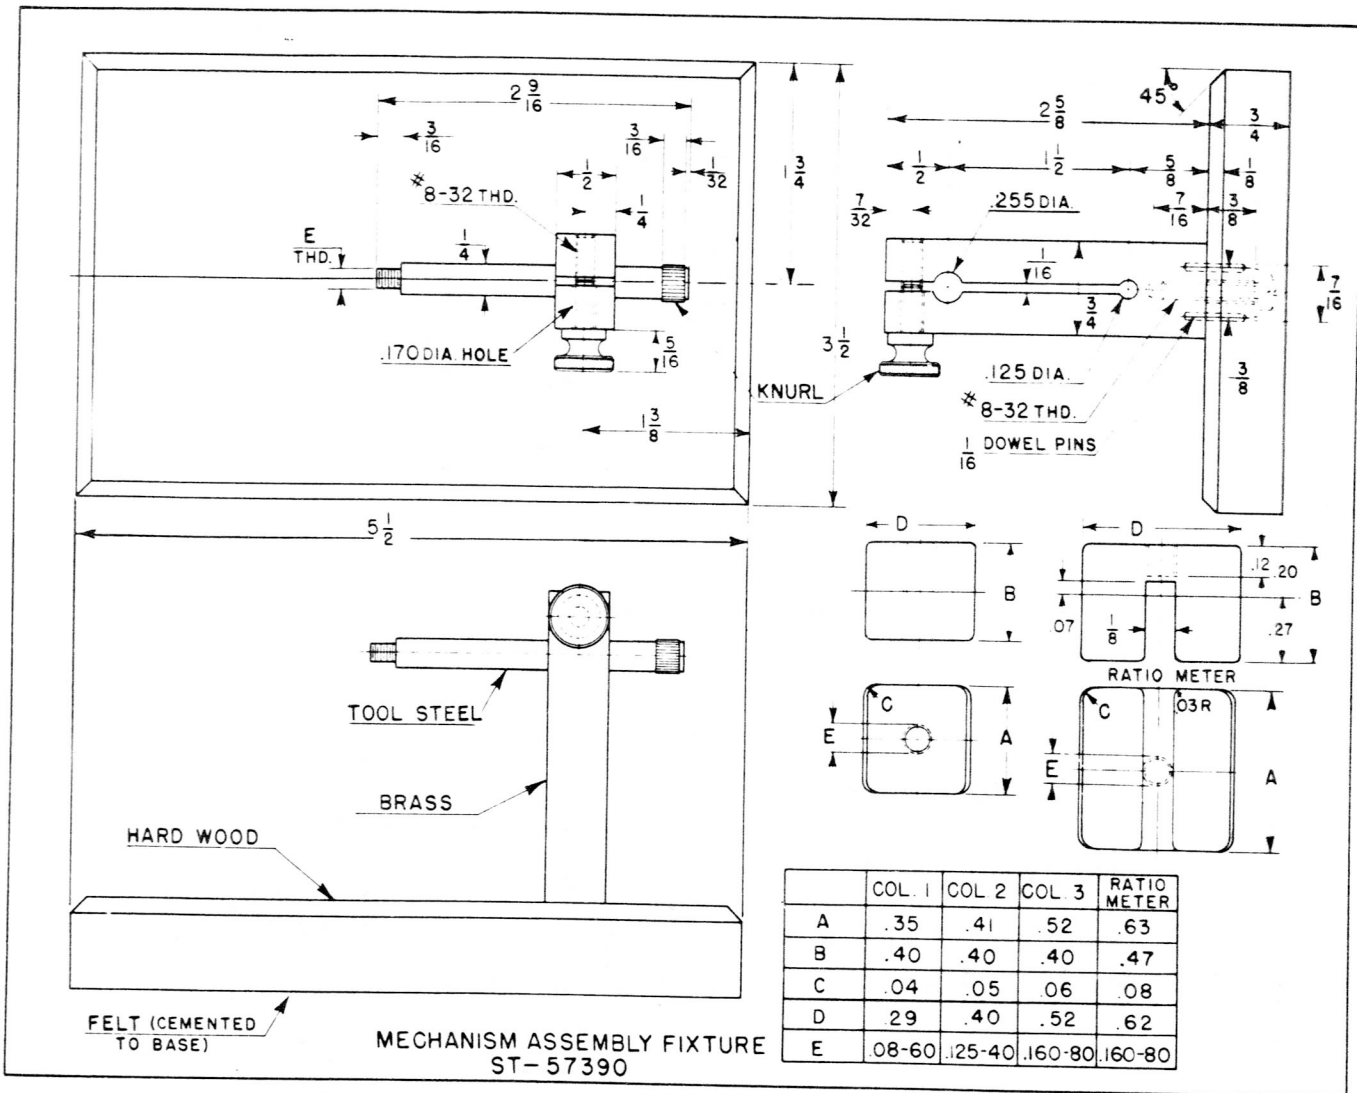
Mechanism Assembly Fixture (Part No. ST-57390)
